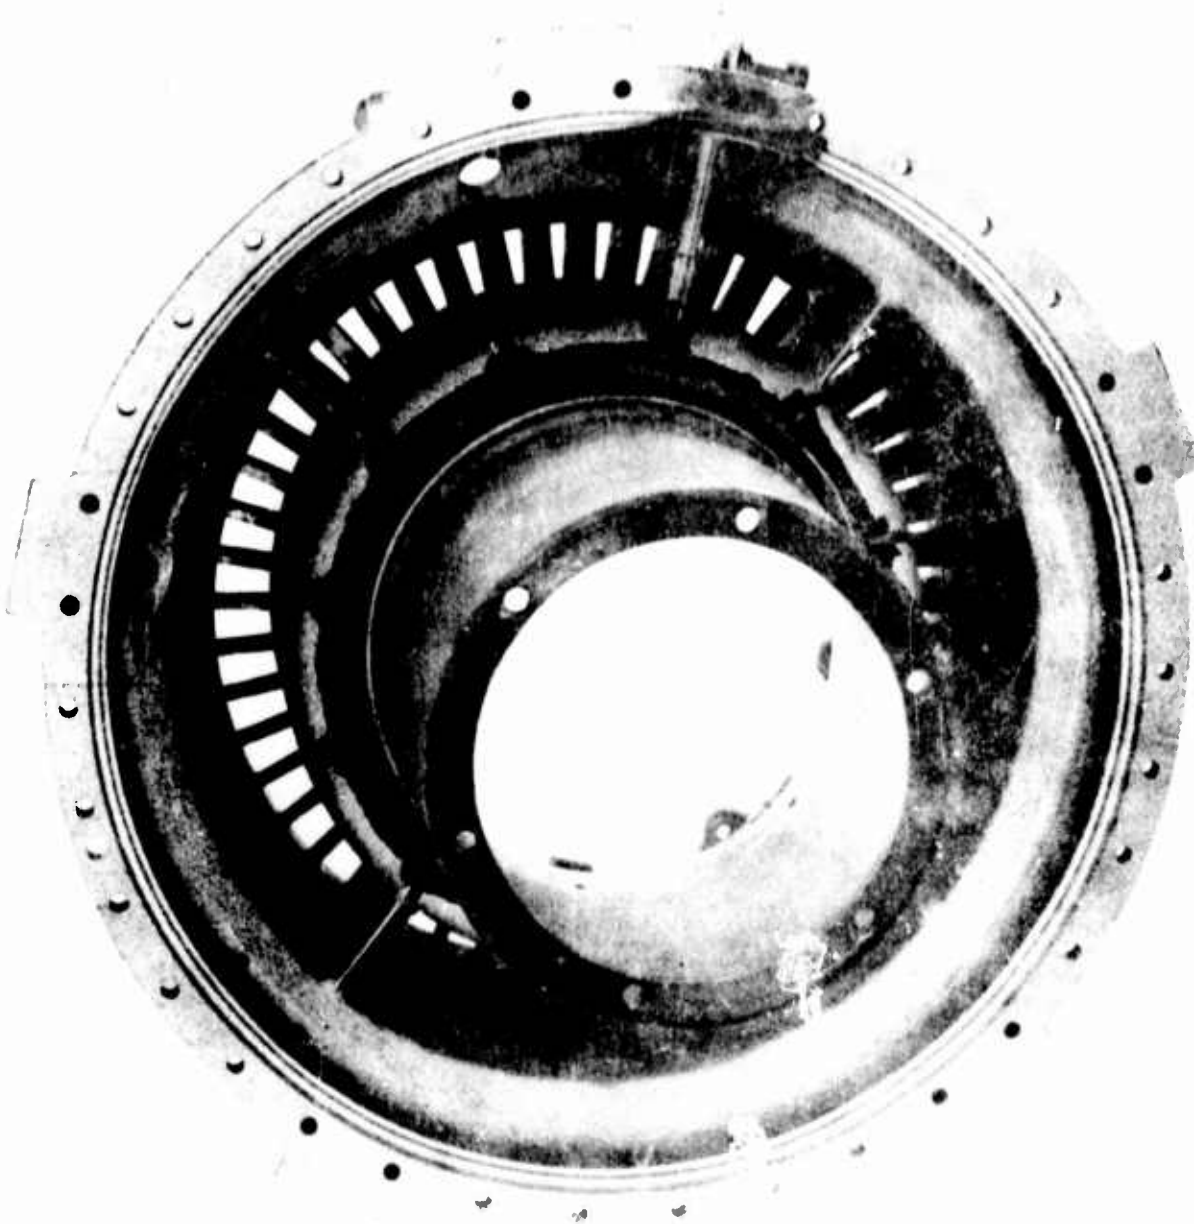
Rear End of Midframe Assembly. The Final Design is Shown in Figure 54.
